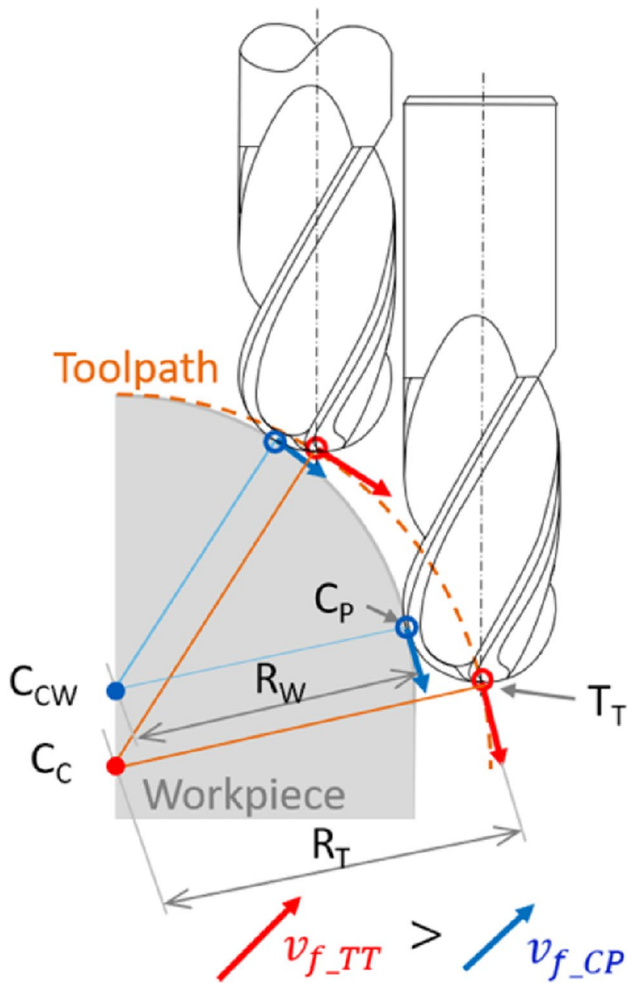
Tool movement relative to the workpiece when radius surface machining
